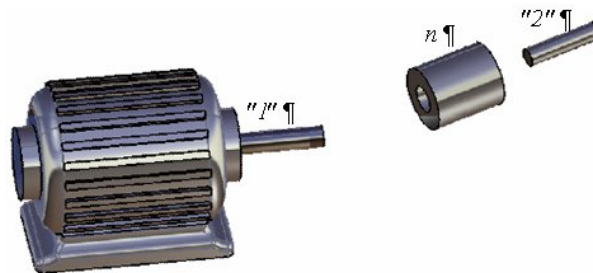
The d.c. motor, coupling shaft and a generic element of the coupling chain
